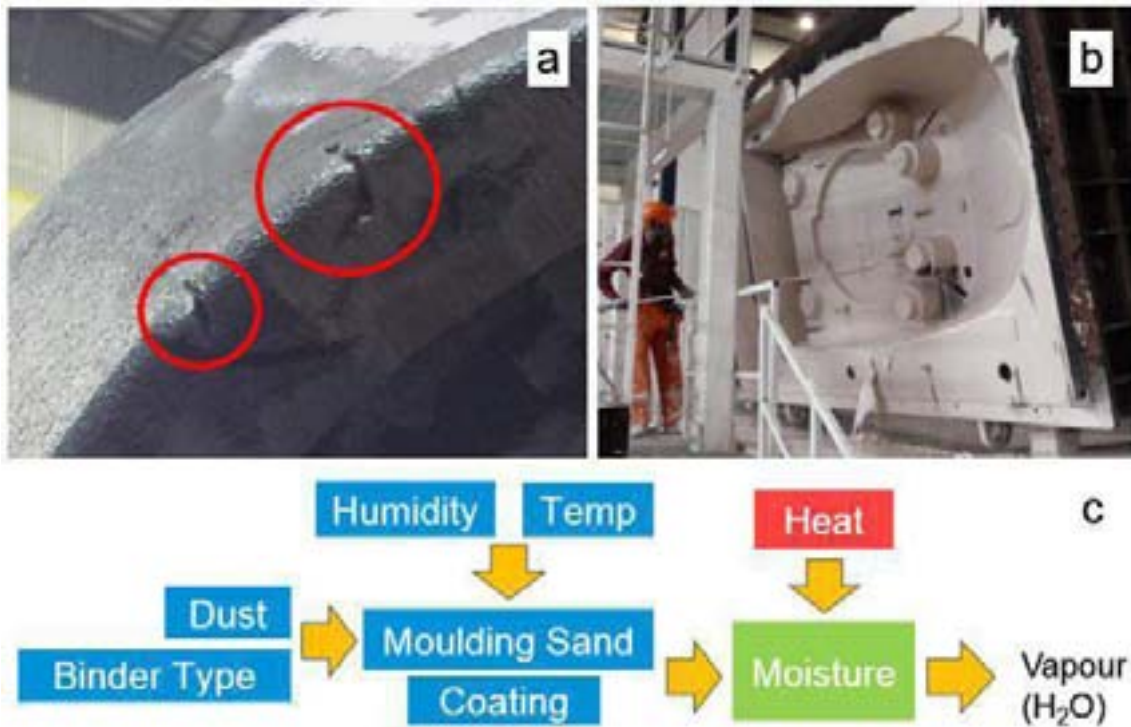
a) Example of moisture related casting defect, b) coating process of furan bonded sand mould, c) parameters affecting vapour generation in a castings process.
